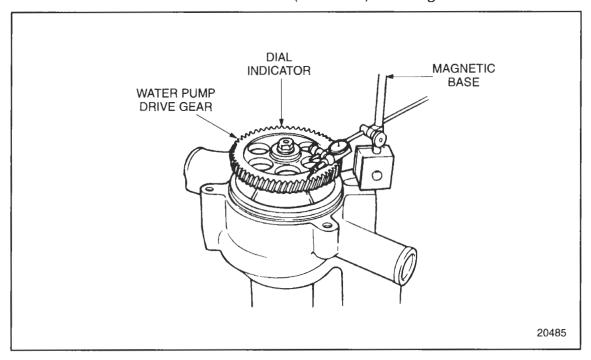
Measuring Water Pump Drive Gear Runout (GCM)
